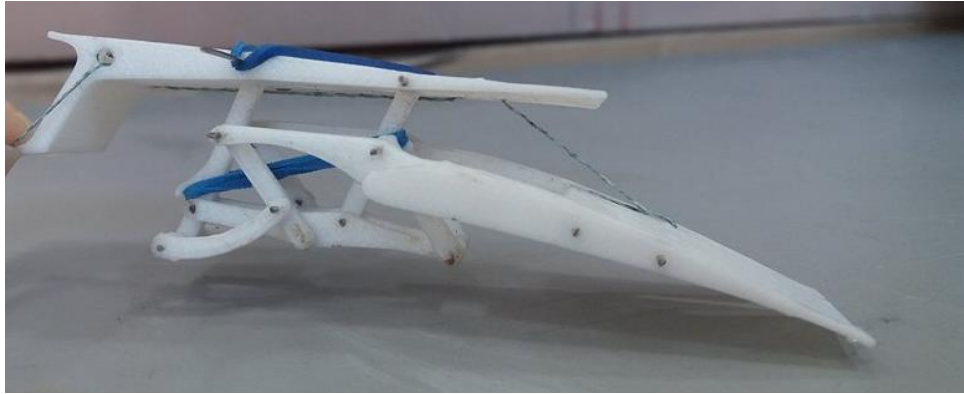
Built 3D print Fowler flap actuation mechanism.
